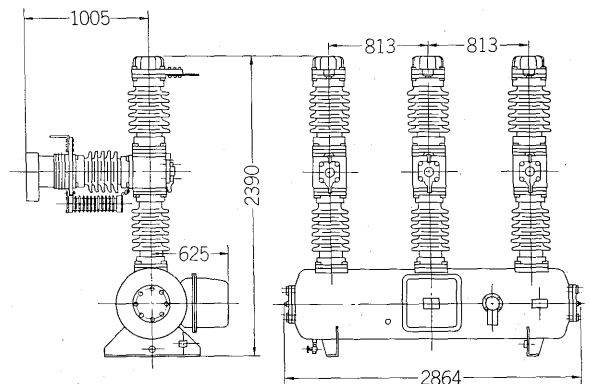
Outline drawing of the RF 702 type (4000 amp)
